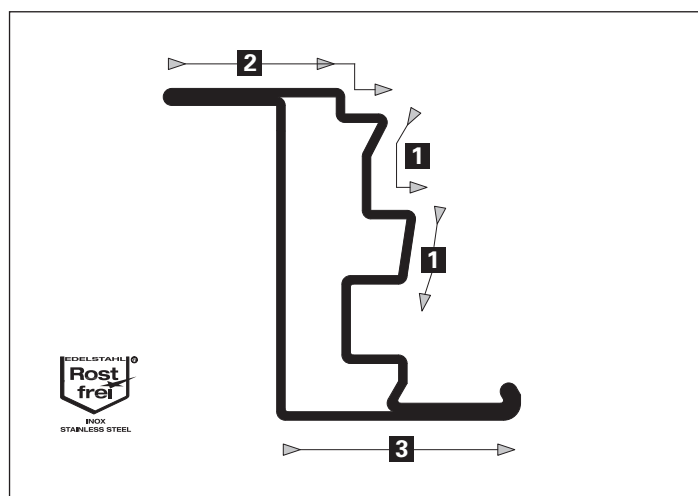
Welding sequence for Jansen-Economy stainless steel window profile
